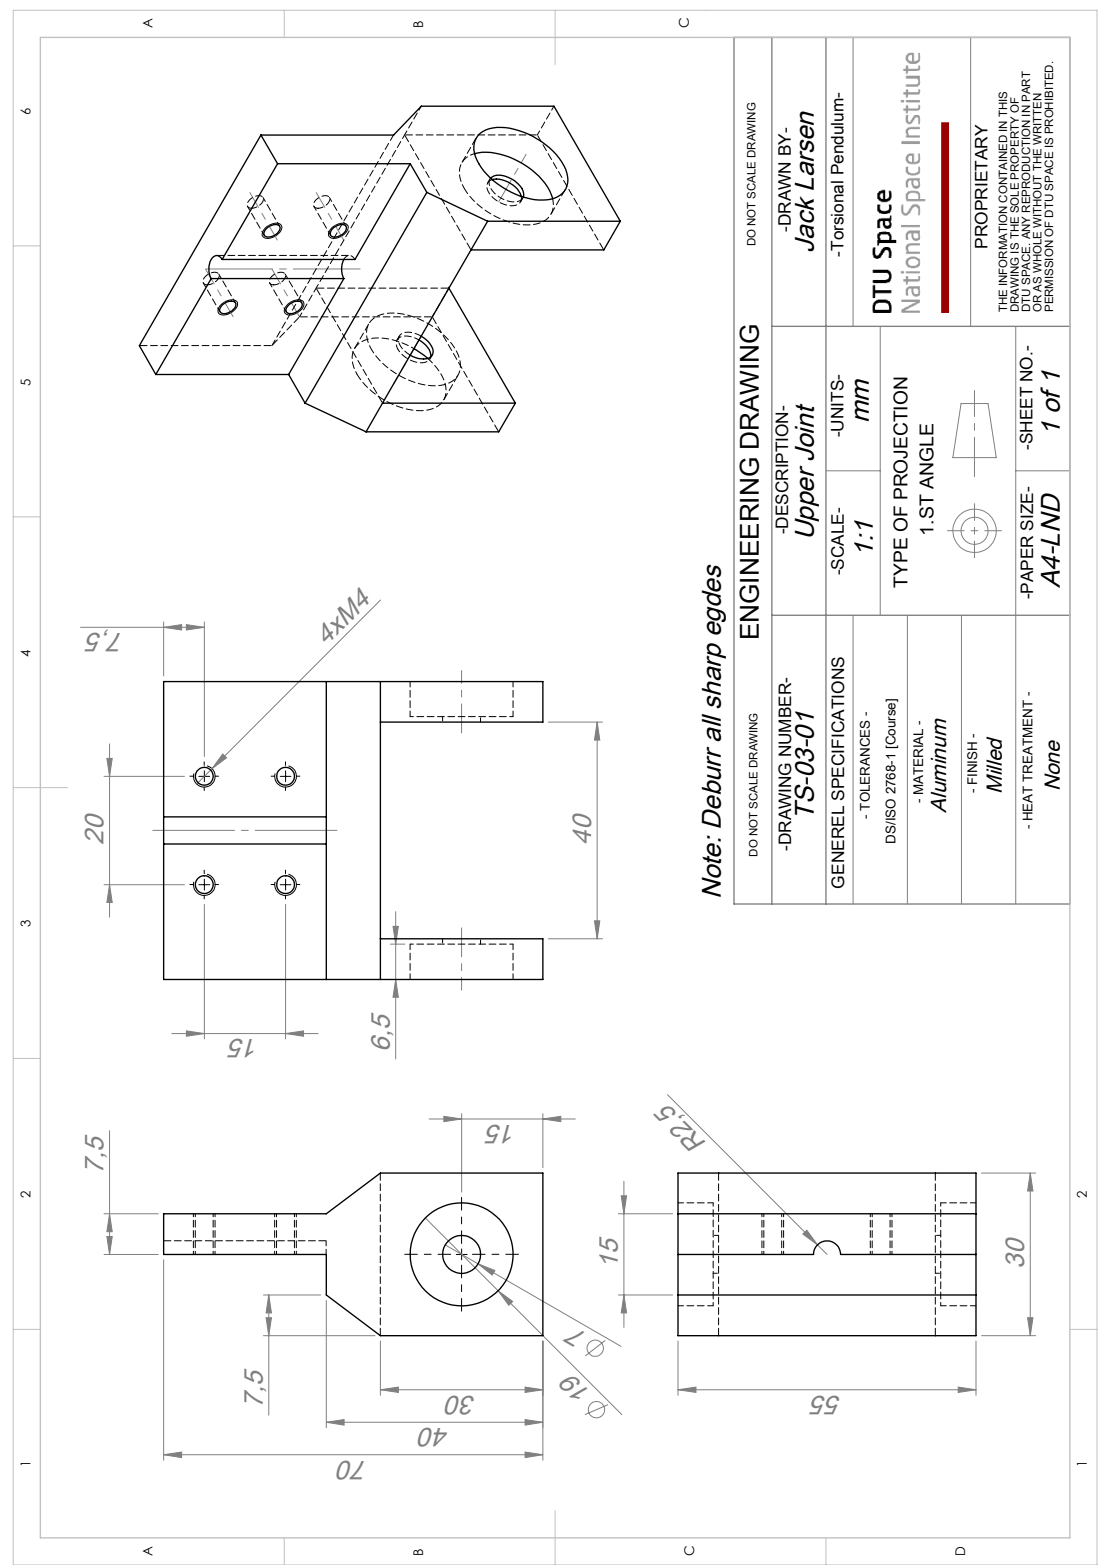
Test Setup: Upper part of joint carrying the horizontal arm.
